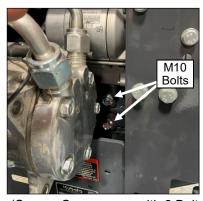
(Secure Compressor with 2 Bolts in Rear)
